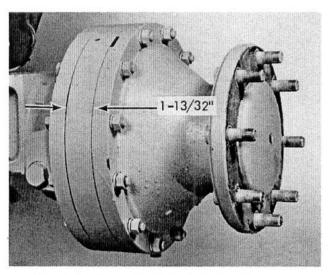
AXLE PLANETARY ASSEMBLY IDENTIFICATION — WIDE RING GEAR
